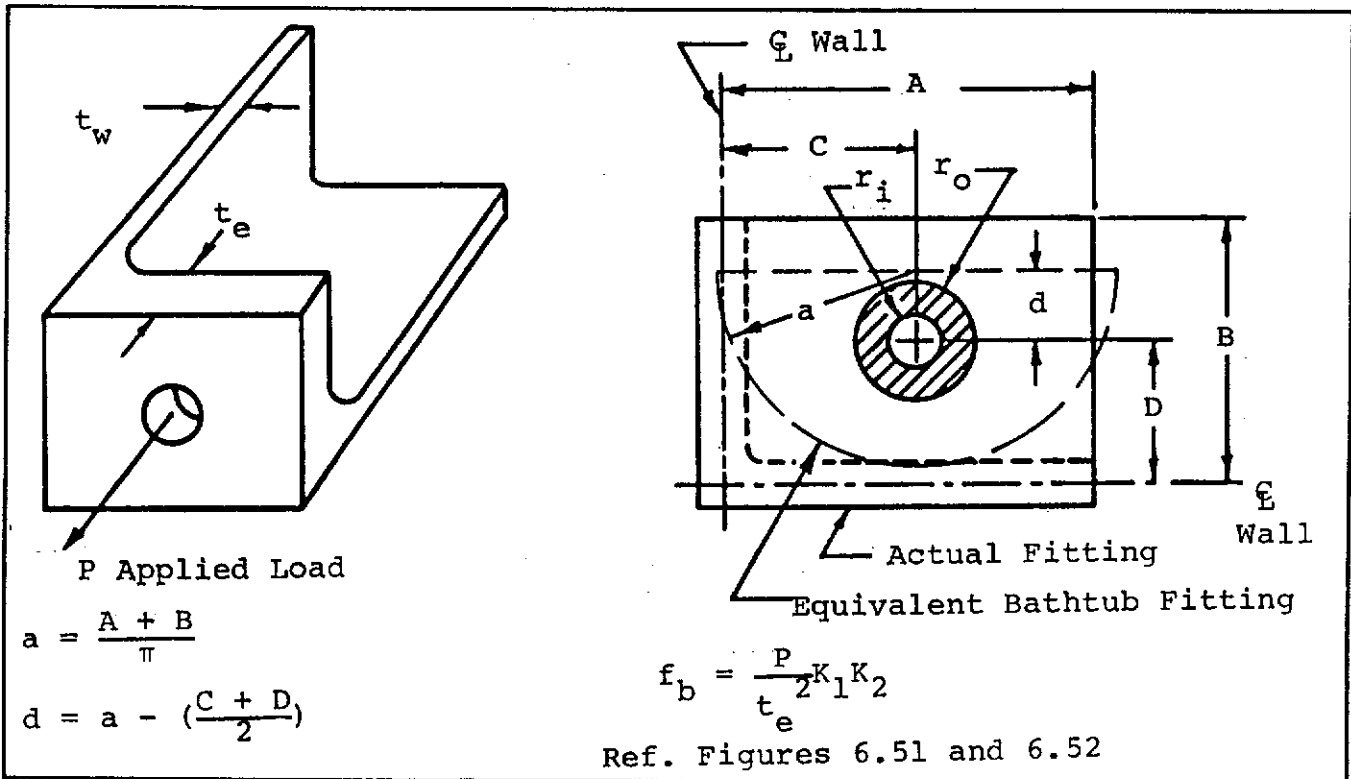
ANGLE FITTING - END PAD BENDING ANALYSIS
